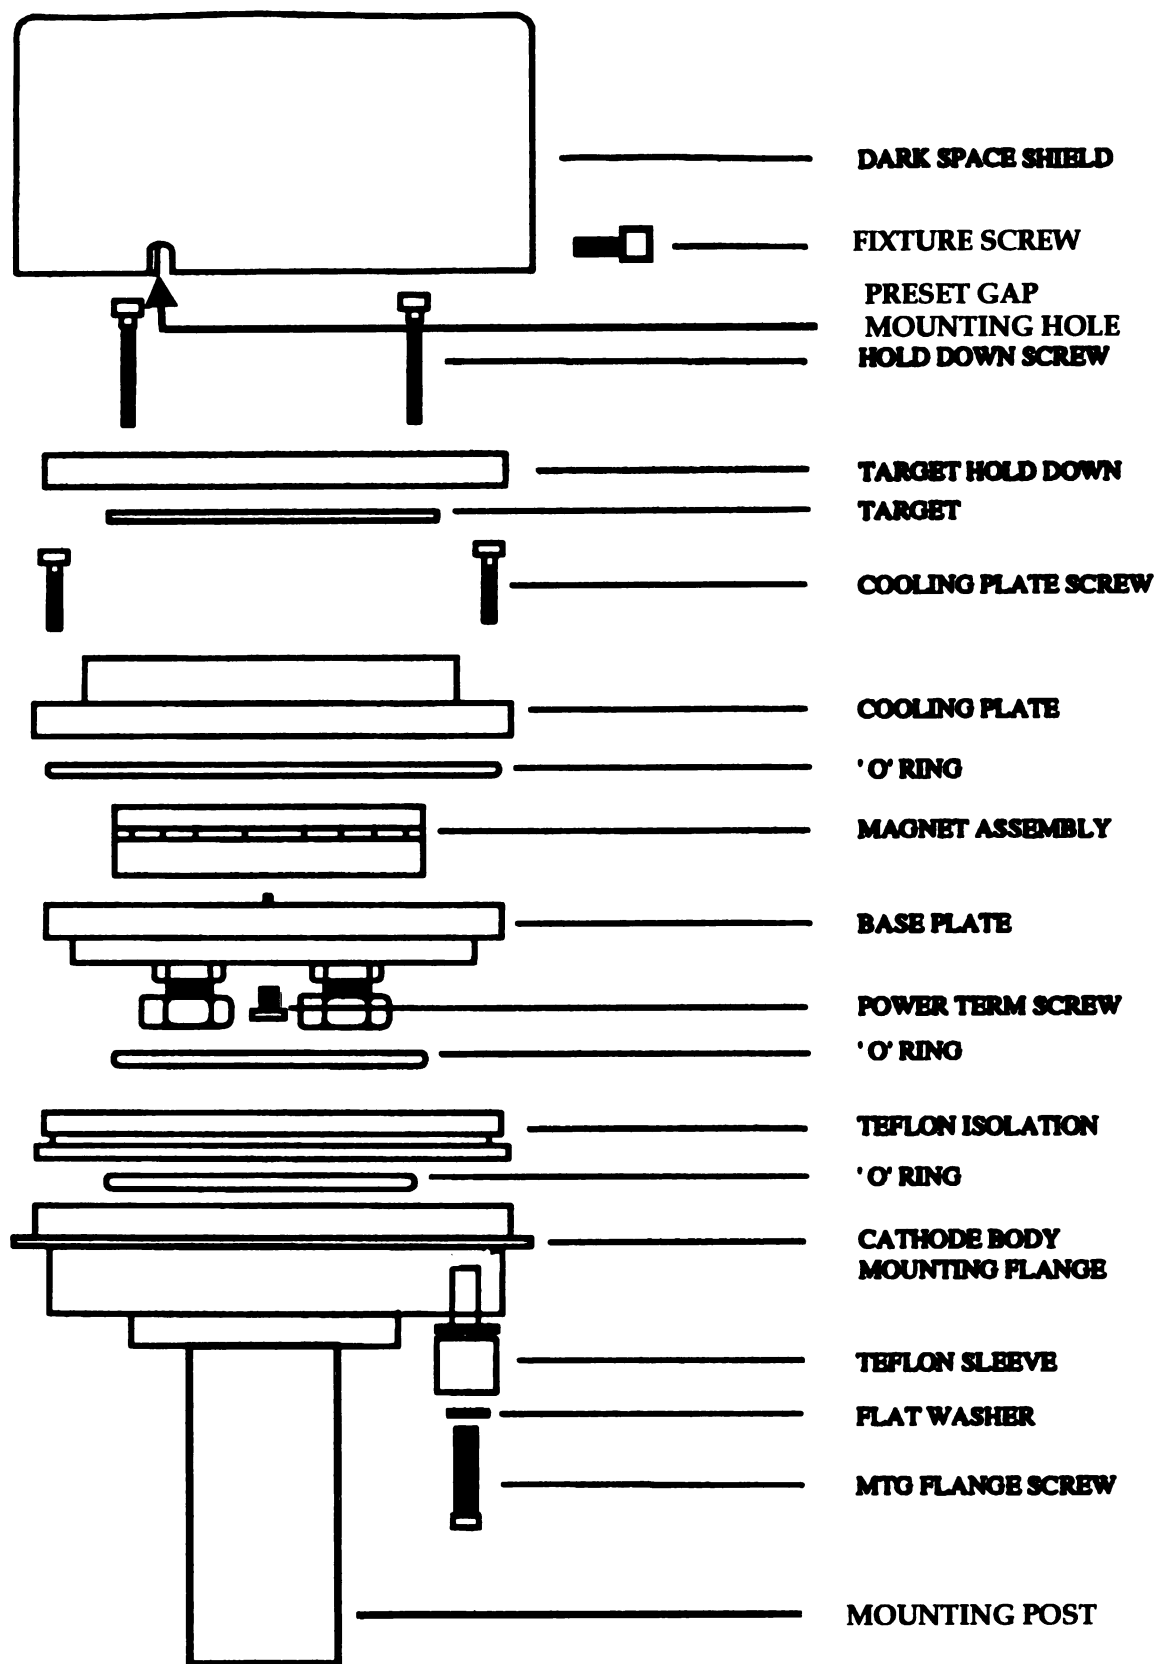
Torus 3M Magnetron Sputtering Gun Assembly
